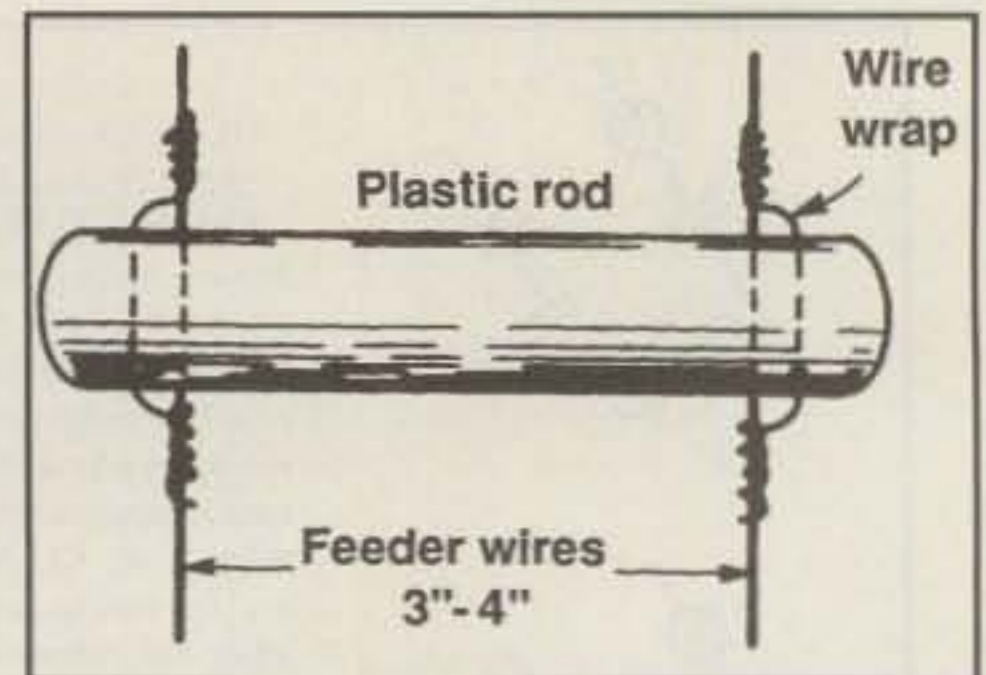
Double sets of holes drilled at each end of a spreader permit wire wrap to hold the feed wires in place.
